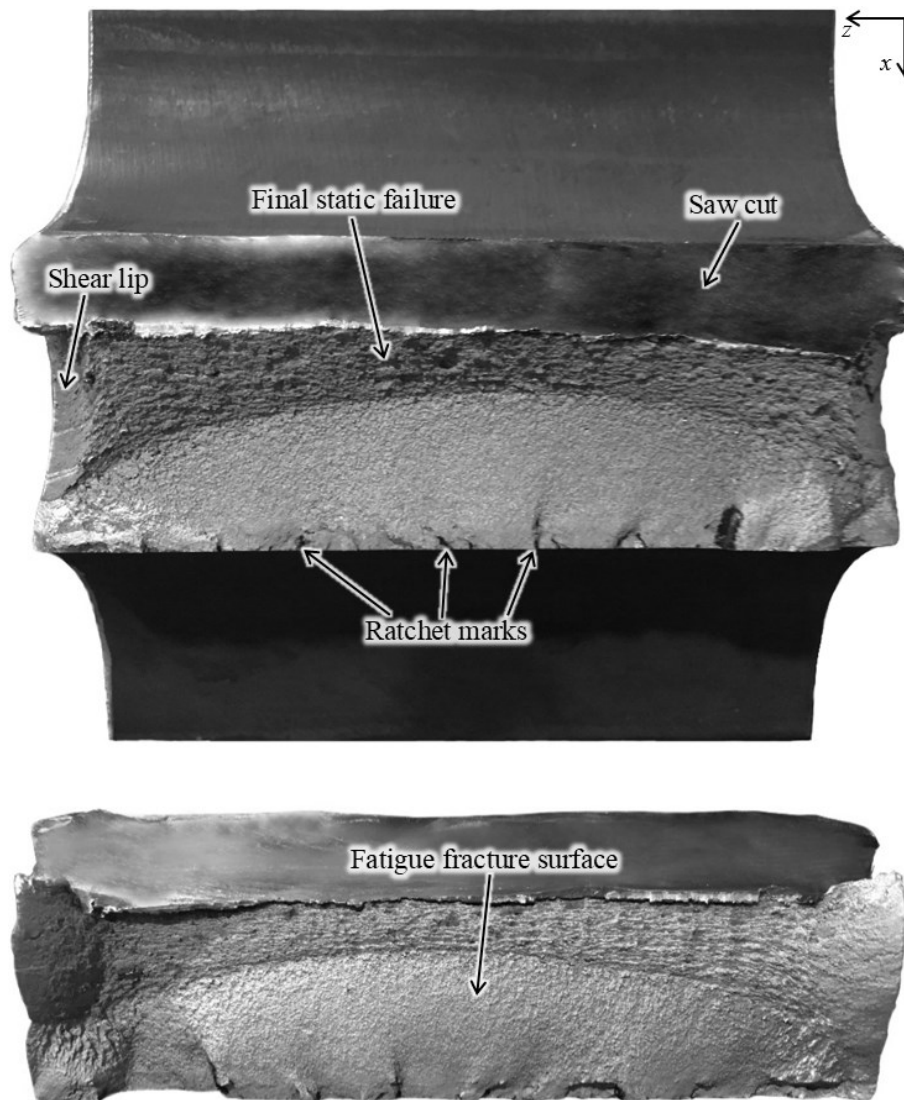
Welded joint of T1 after final failure at the weld toe
